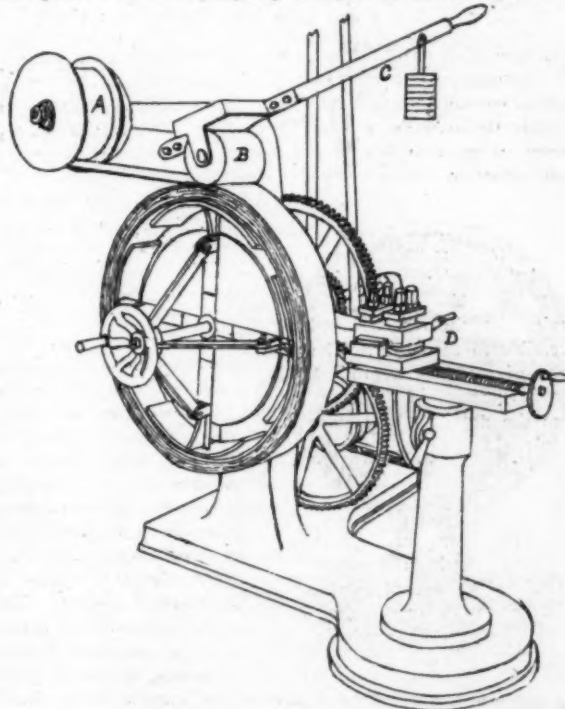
PRICE SOLID TIRE WRAPPING MACHINE.
